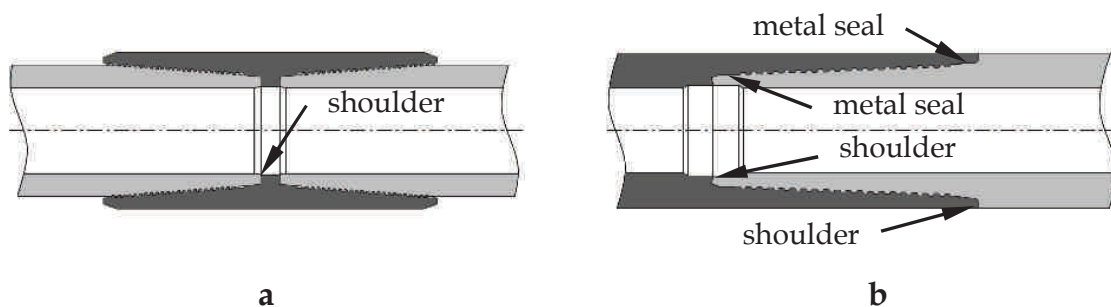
a) single shoulder T&C connection; b) double shoulder integral flush connection.
